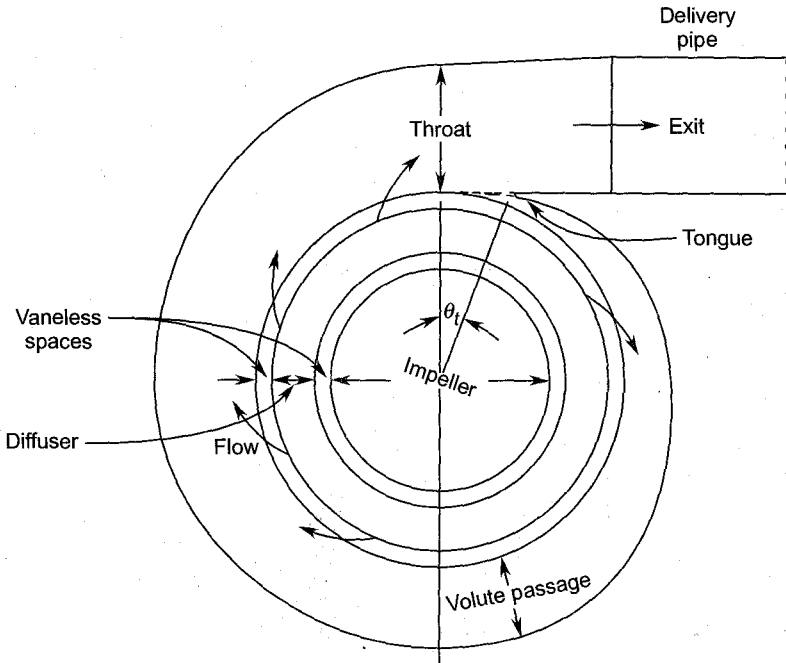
Scroll or volute casing of a centrifugal machine
